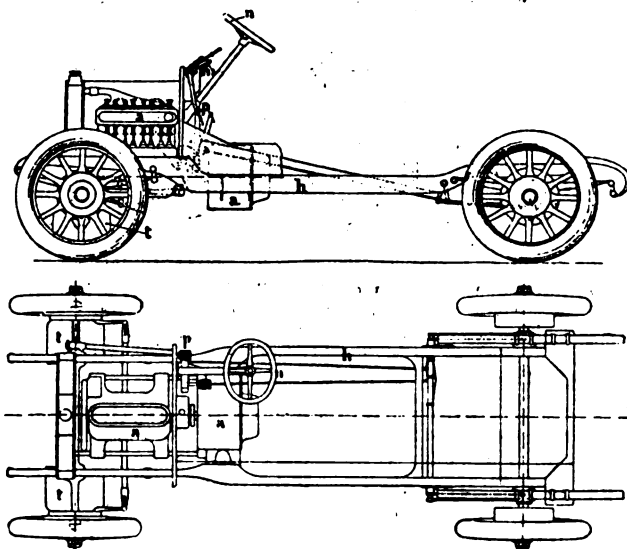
Chassis of Krieger Petrol-Electric Car.
